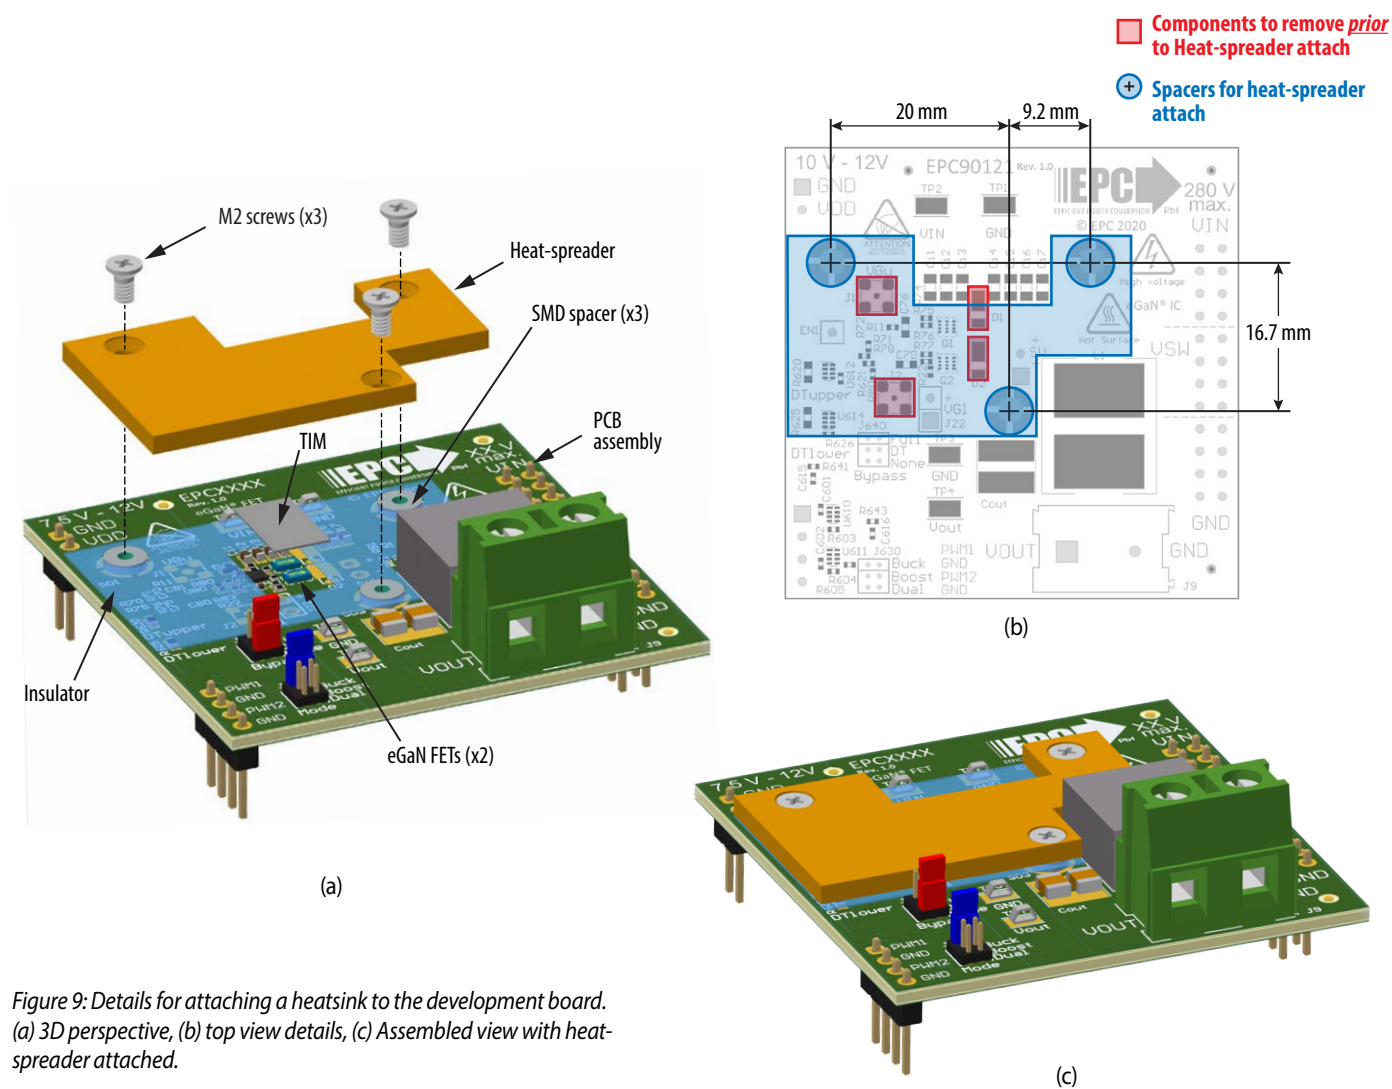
Details for attaching a heatsink to the development board. (a) 3D perspective, (b) top view details, (c) Assembled view with heat-spreader attached.
